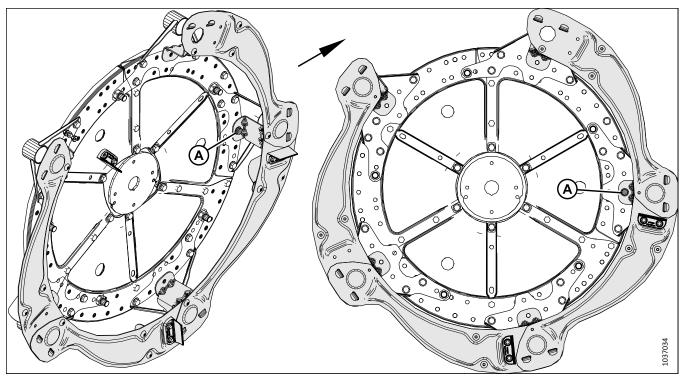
Five-Bat Reel – Partially Assembled Reel Endshields on Reel
